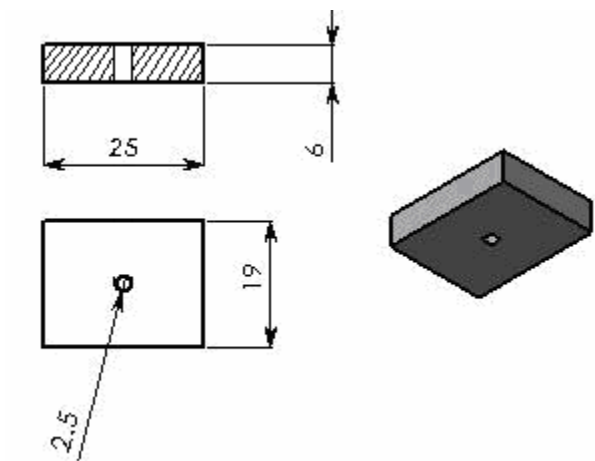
Drawing for the bottom plate (All dimensions: mm, material: aluminum)
